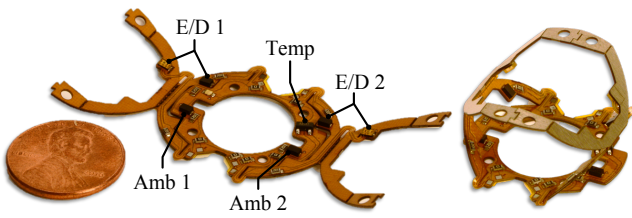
To-scale sensor linkages shown both pre- and post-assembly with a US penny for scale.
